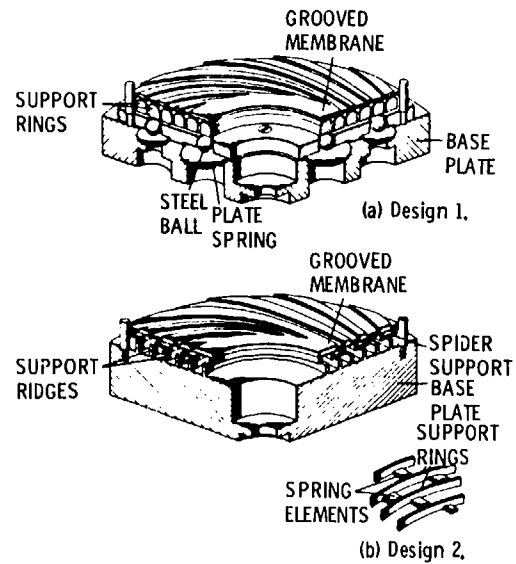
Isometric drawings of thrust bearings. (From ref. 59.)
